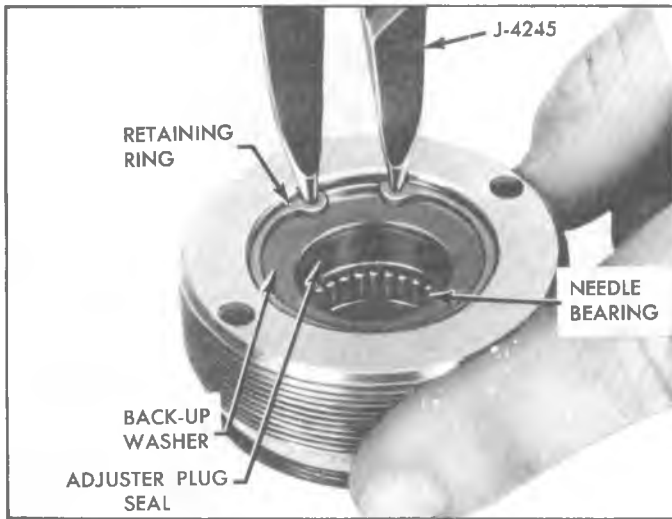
Removing Adjuster Plug Seal Retaining Ring
